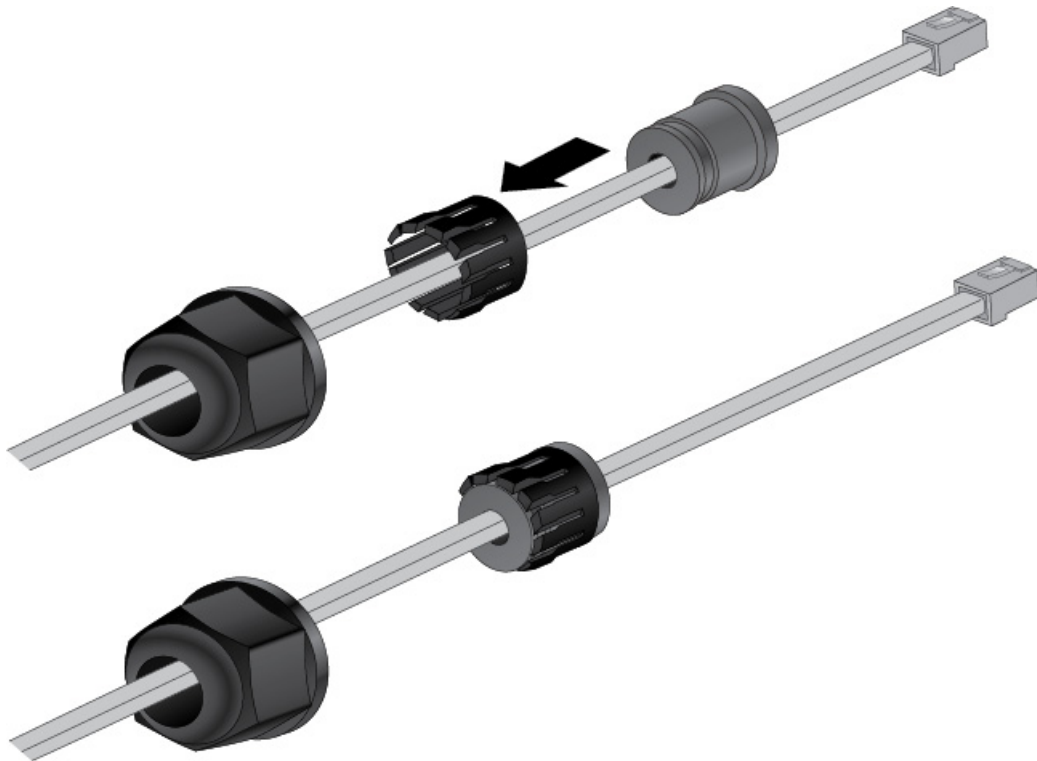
Inserting the Sealing Insert in the Clawing Clamp
